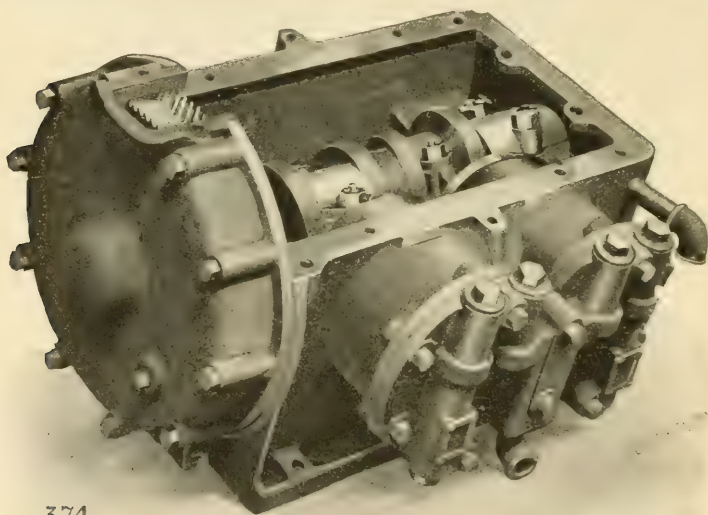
COMPRESSOR OF WHICH THE MOTOR FORMS THE CRANK CASE COVER
